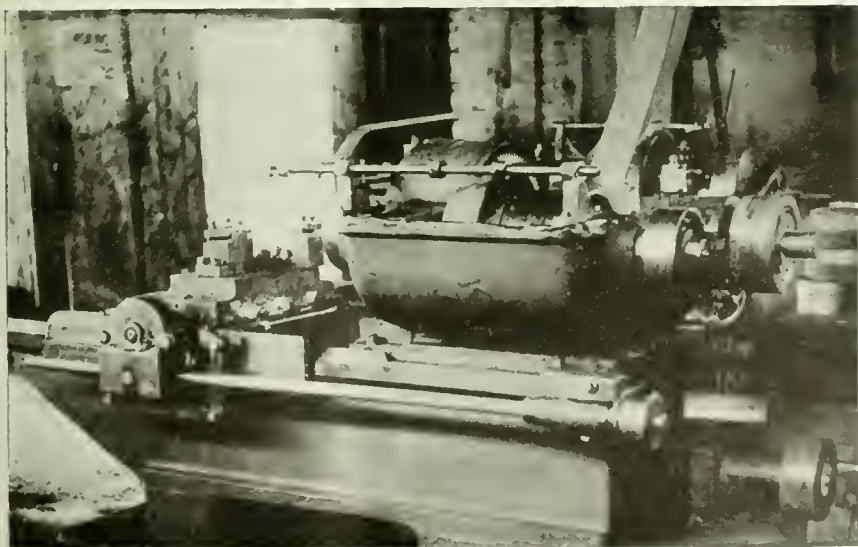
ROUGHING ADAPTERS SPECIAL SHELL MACHINES.
